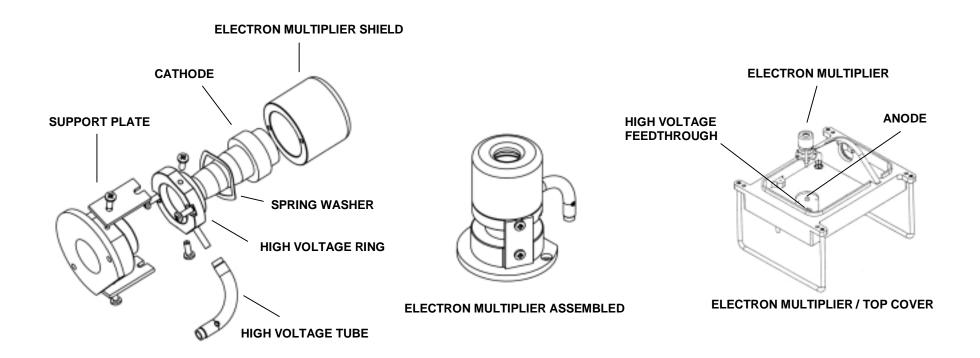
Electron multiplier (exploded view, assembled view, top cover view)
